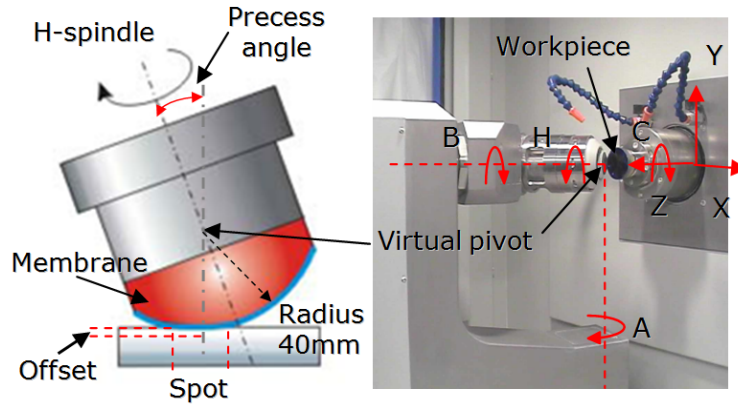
Principle of precessed polishing tool and 7-Axis CNC machine.
